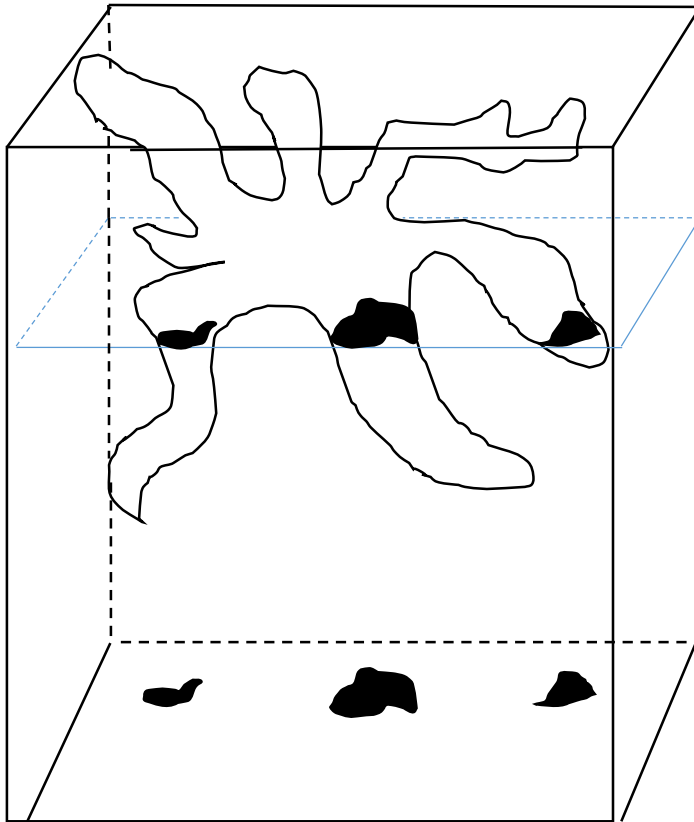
Schematic drawing of a shrinkage pore and the resulting two-dimensional image when a sample is sectioned, after ref. [36].
